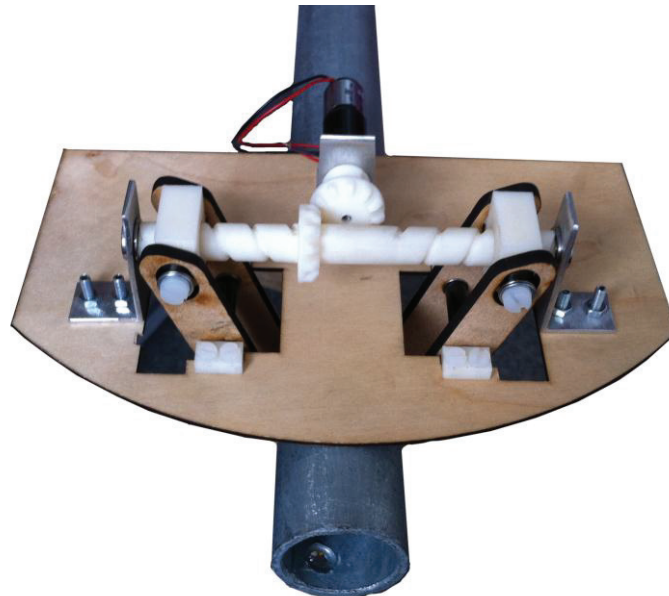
Original design showing bevel gear used for power transfer. (Prototype showing one half of the design only)
